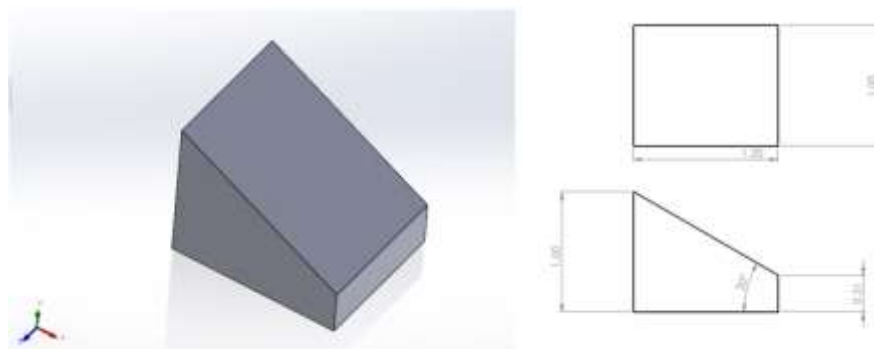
Single Slope Solar still and its dimensions design by SOLIDWORKS
